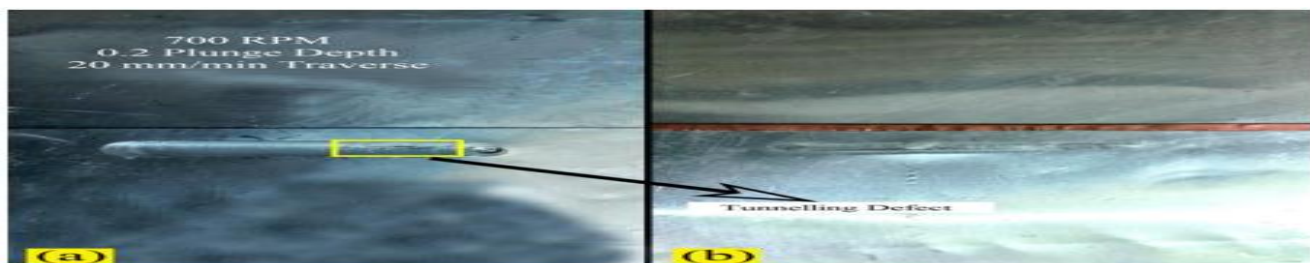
700 RPM; 0.2 mm Plunge Depth; 20 mm/min Traverse Speed (a) Front Side of Weld (b) Back Side Of Weld
